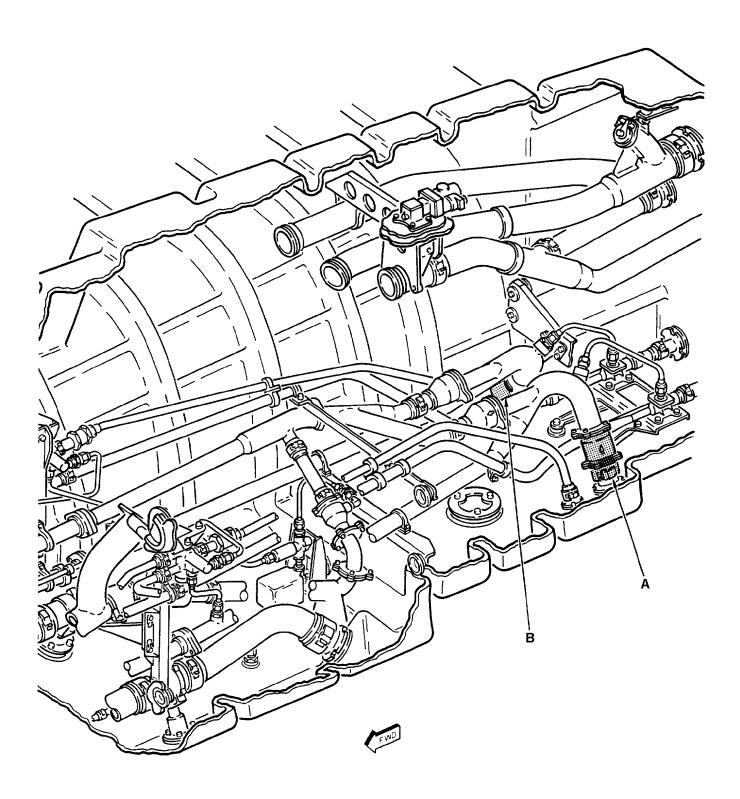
Engine Motive Flow Check Valve (5VAP561 or 5VAR562) (Sheet 1)
